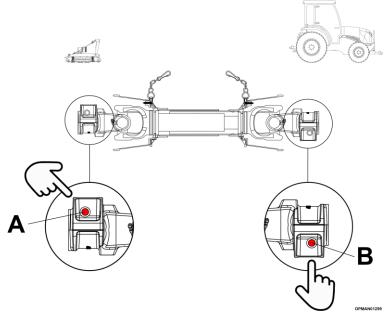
Rollicut Input Driveshaft Fitting & Removal
